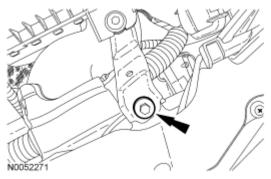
Locating Brake Booster Vacuum Hose Courtesy of FORD MOTOR CO.
